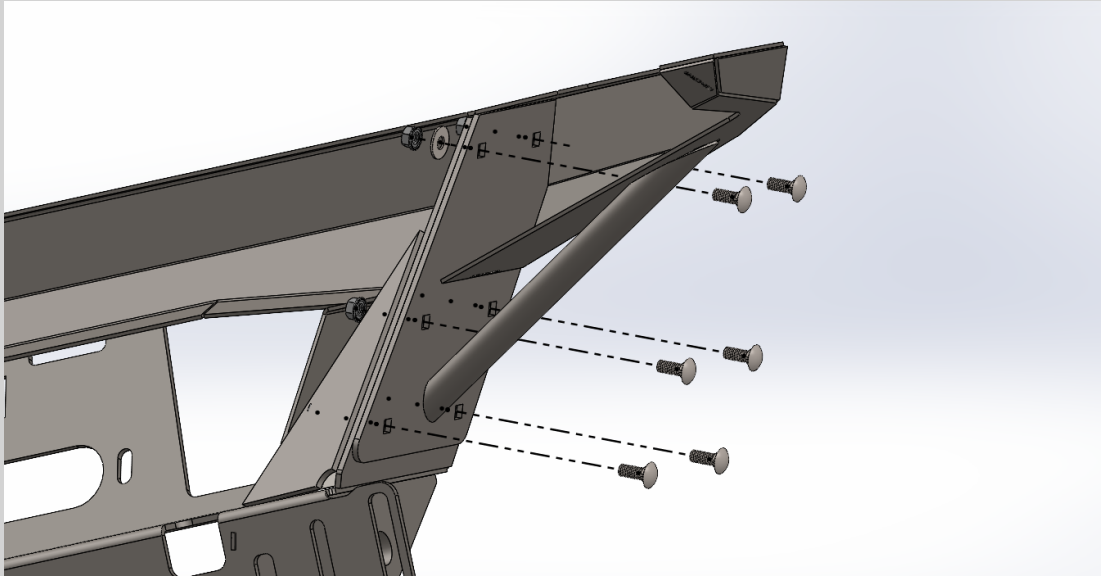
$\frac{3}{8}$ " carriage bolts, washers, and flange nuts used to mount the side wings to the bumper center.
